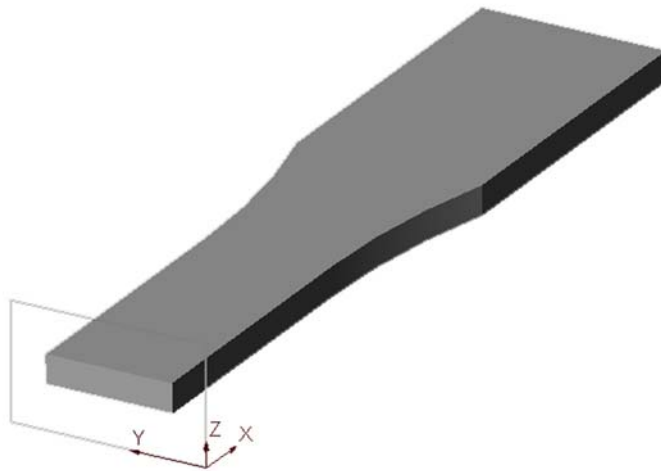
Schematic of a composite test specimen showing the cross-sectional view.
